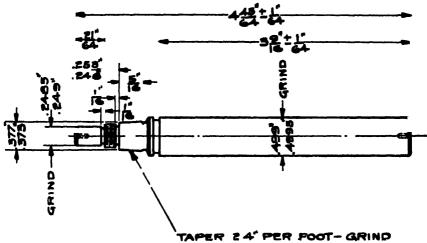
REPRESENTATIVE PART THAT CAN BE FINISHED READILY BY MULTIPLE-WHEEL GRINDING
